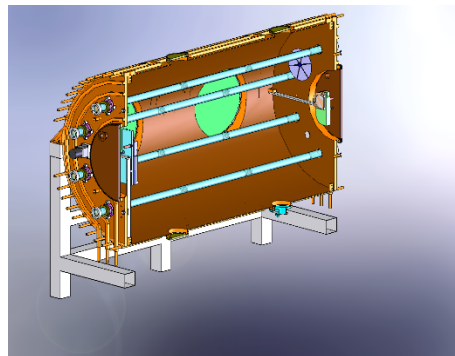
Solidworks cutaway to show the half the lighting system, the large ISO-K500 access flanges, one of the fans and the mounting of the FTIR mirrors.
